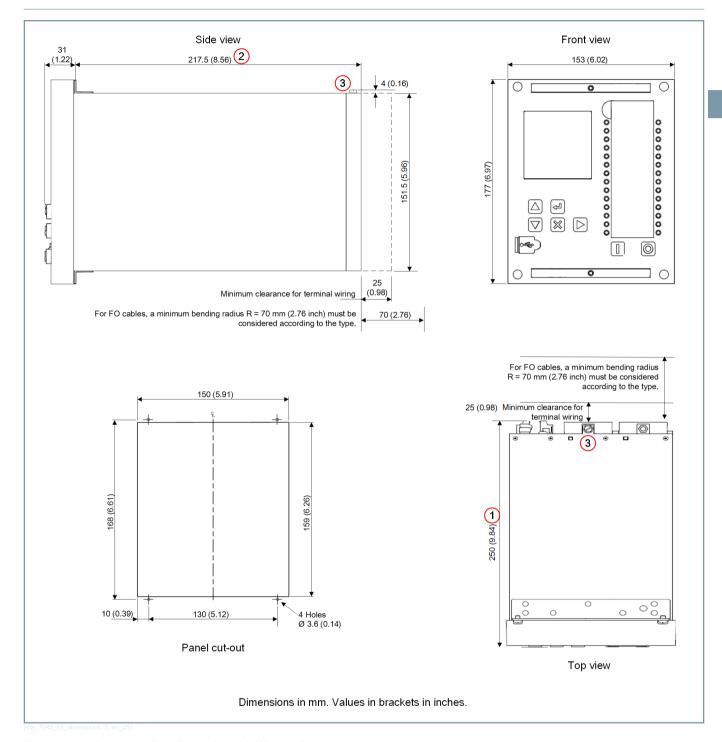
/25 Size 6 Case: Dimensions and Panel Drilling Details
